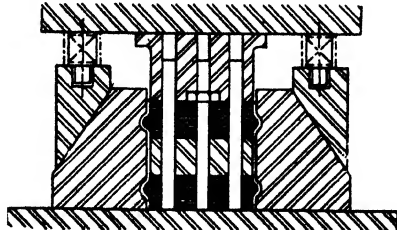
A split die, as here illustrated in section, can be used to form a cylindrical part with expanded circumferential ribs, if a rubber punch of proper design is employed.
